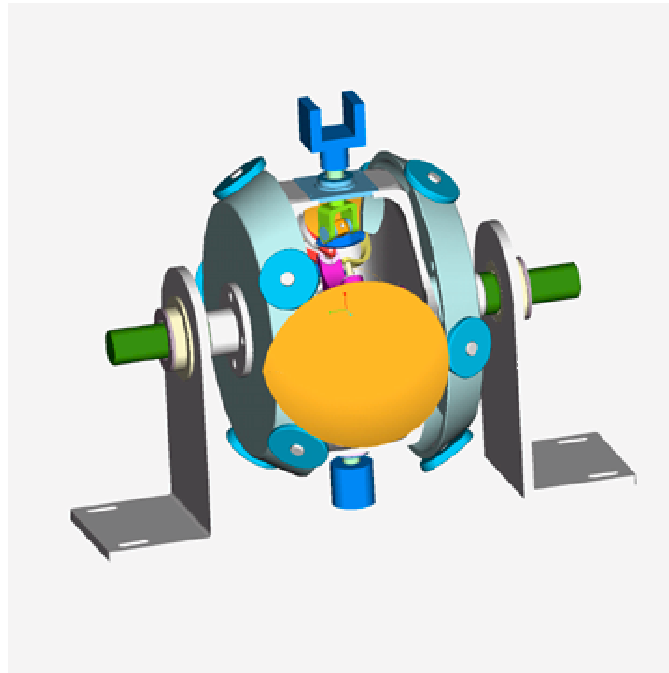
An innovative PRW with bevel gears replaced by cam-roller pairs
